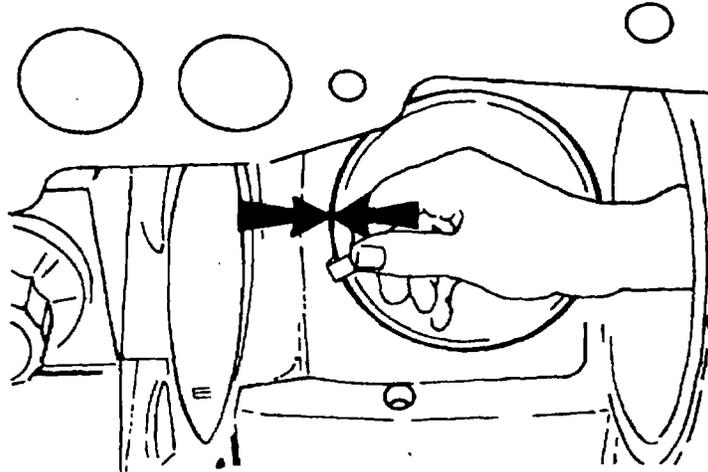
Checking Cylinder Liner To Lower Bore Clearance
